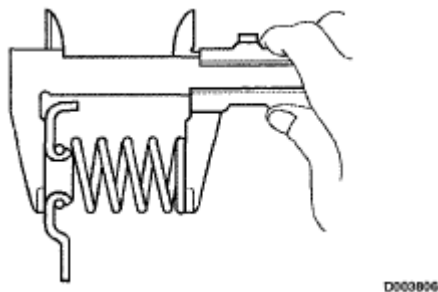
Measuring Free Length Of Spring Together With Spring Seat Using Vernier Calipers
